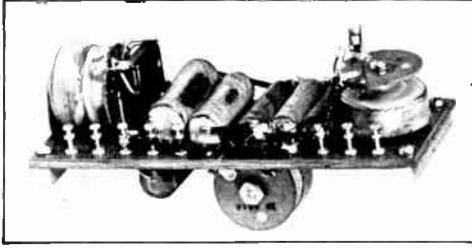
The low-pass filter is assembled as a unit on its own mounting board. Readily-available parts are used throughout.
